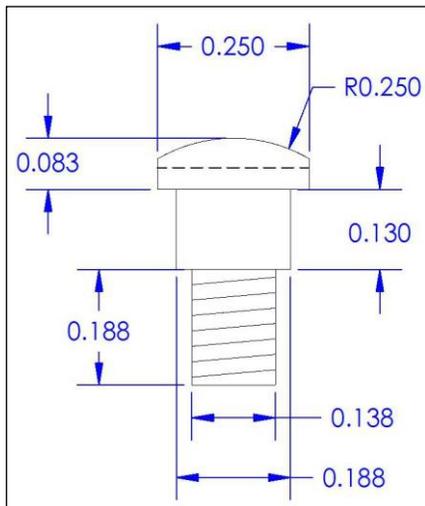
Construction drawing for the barrel click screw. The screw is made from drill rod and the head is rounded to a radius of .25"
